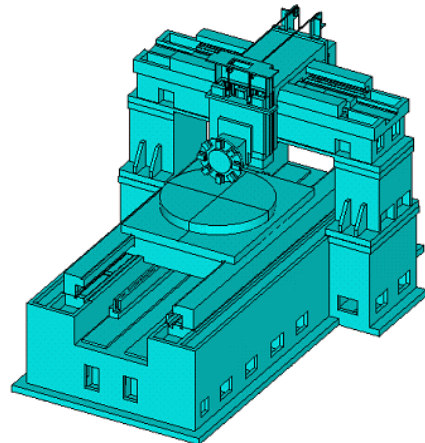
Virtual prototype of the large-surface micro-grooving machine
